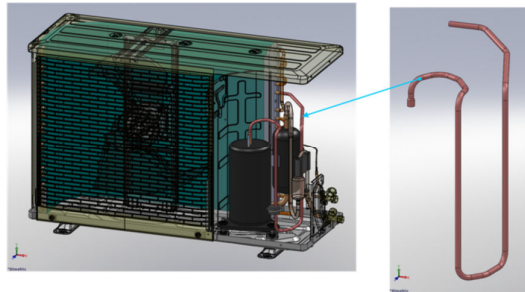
3D CAD Model of the Multi-bent Copper Discharge Tube and its Assembly in a 1.5 Hp Outdoor Air-Conditioning Unit.
